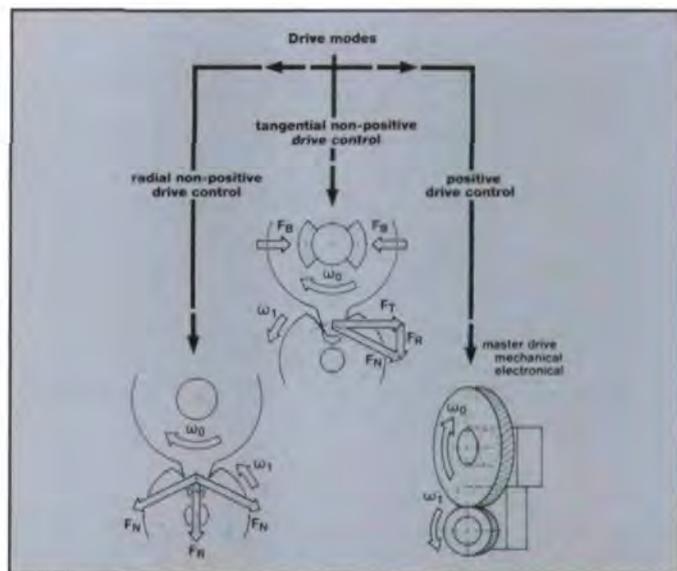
Drive modes for hard machining processes with a non-defined geometry of the cutting edge.
